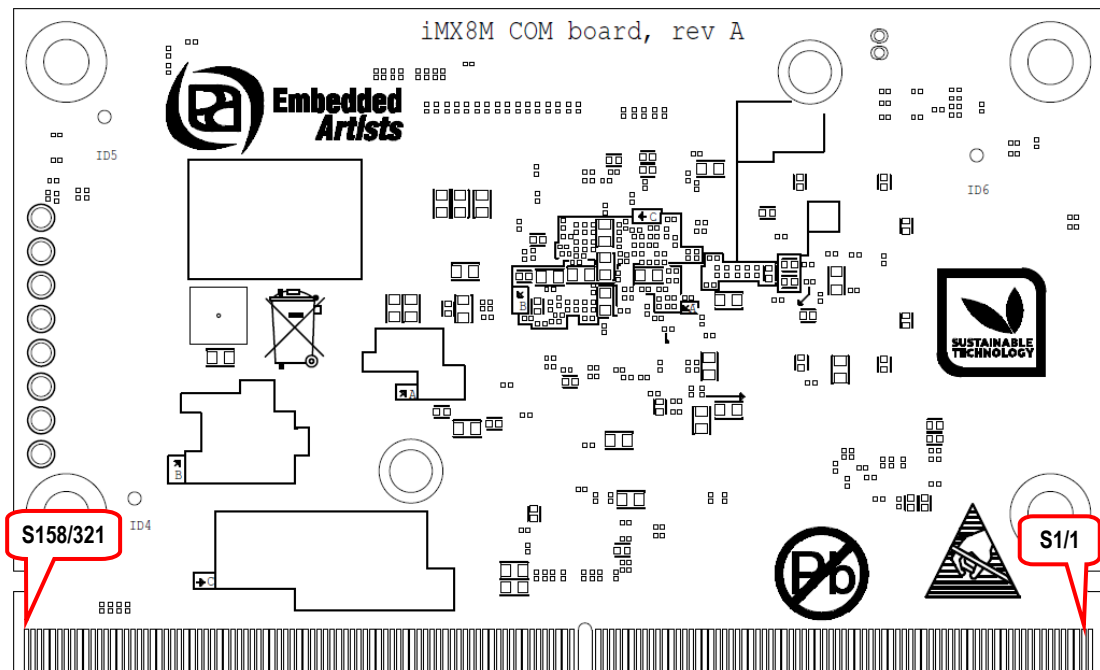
EACOM Board Pin Numbering, Bottom Side
